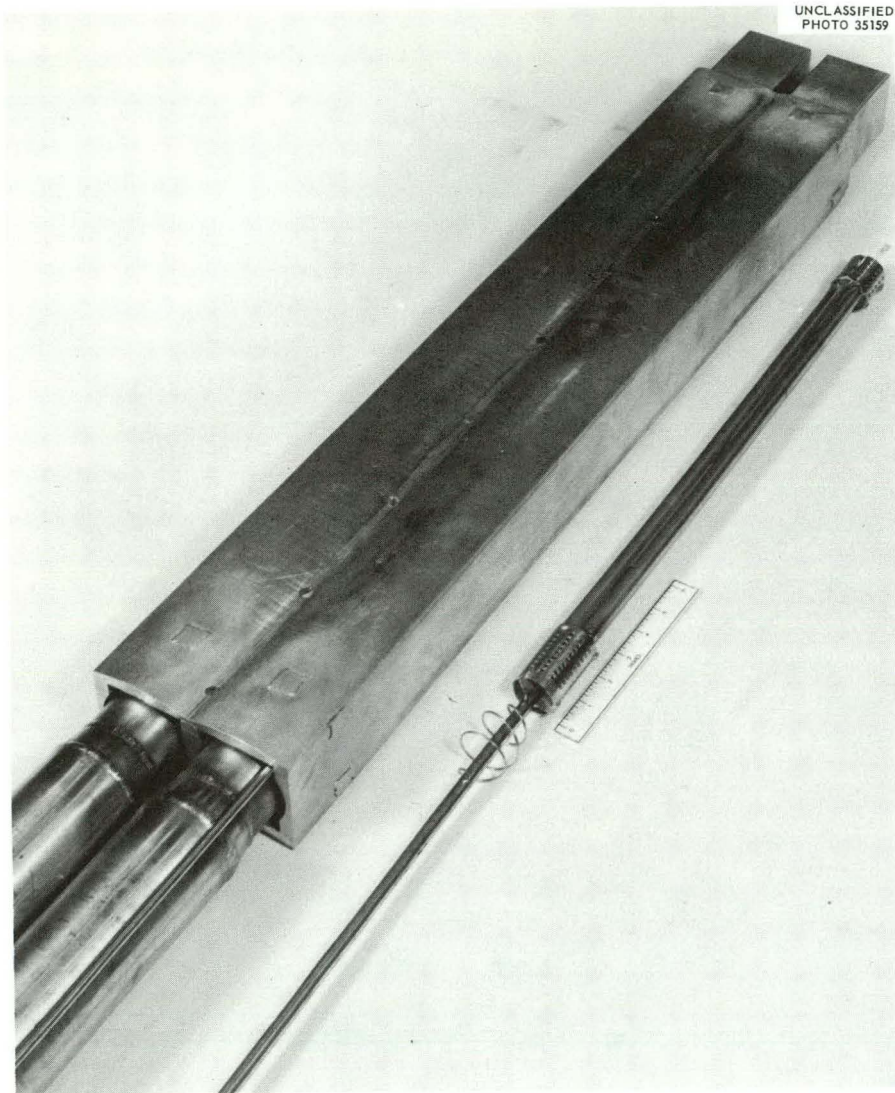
In-Pile Section Assembly Showing the Aluminum Filler Box and a Set of Dummy NS "Savannah" Test Specimens.
